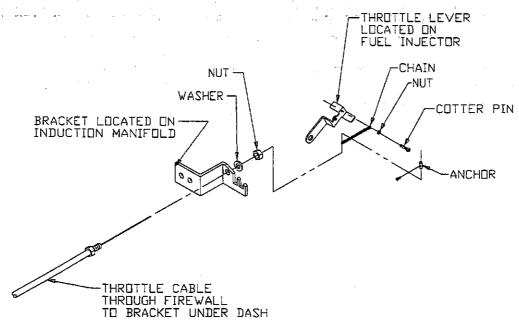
DIESEL THROTTLE CABLE INSTALLATION
